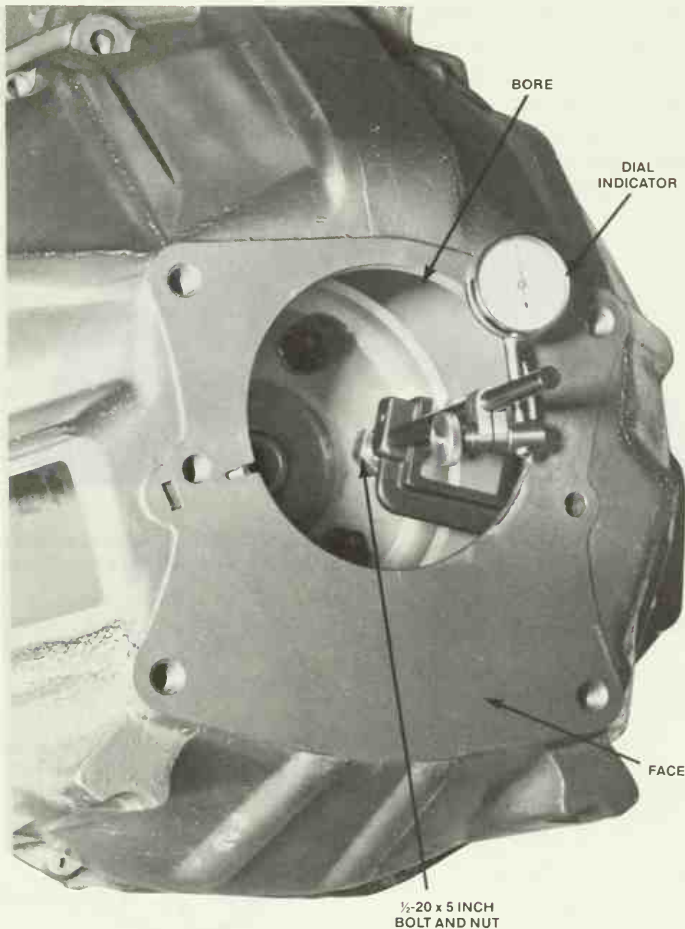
Checking runout with a dial indicator. (American Motors Corporation)
